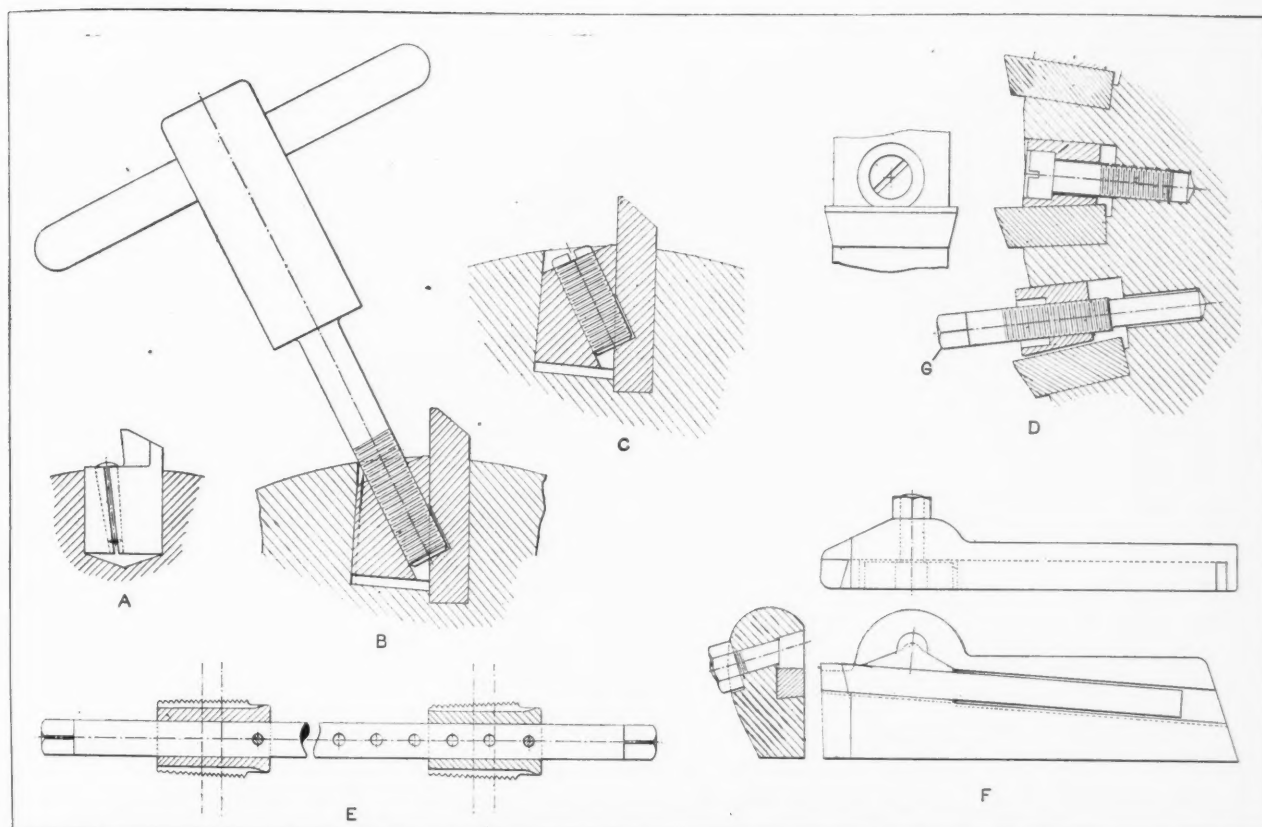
Other Examples of Wedge and Screw Fastenings for Cutters
